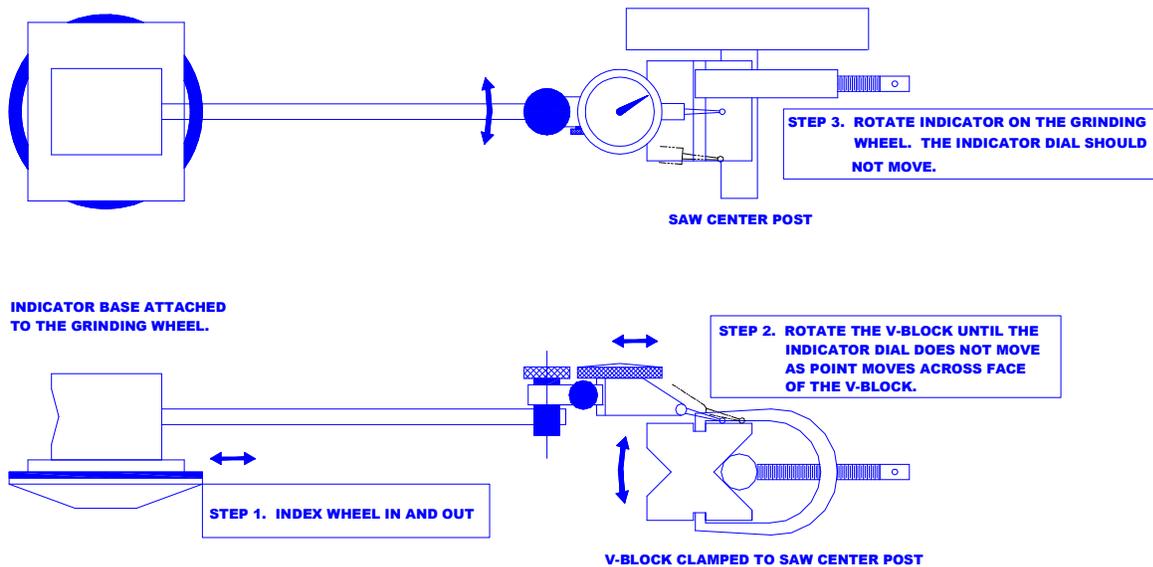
Method for measuring from the grinding wheel to the saw center post. Top and side views shown. Similar setups can be used for top grinders and side grinders.
